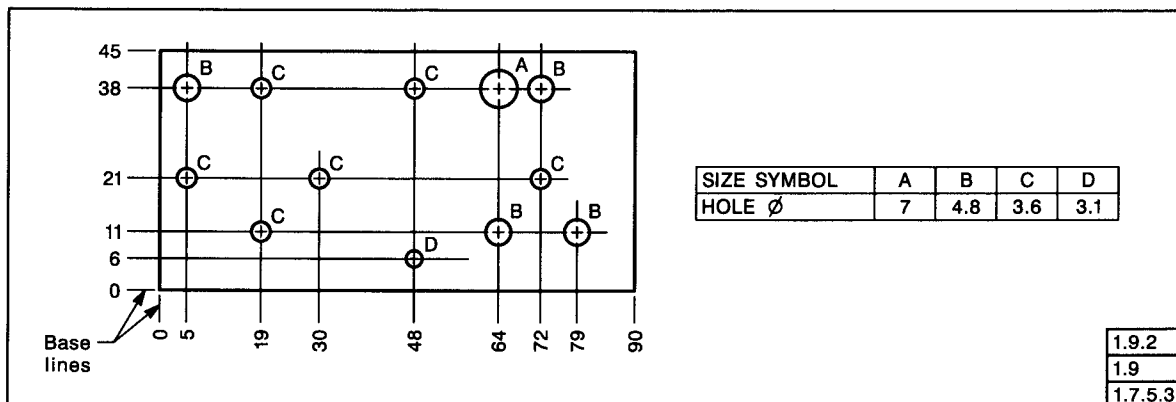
RECTANGULAR COORDINATE DIMENSIONING WITHOUT DIMENSION LINES
